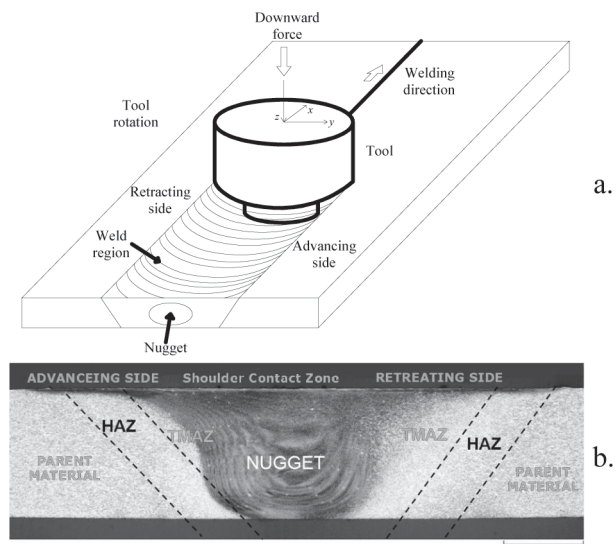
a) Schematic of the friction stir welding process; b) The zone distribution in the weld cross-section
